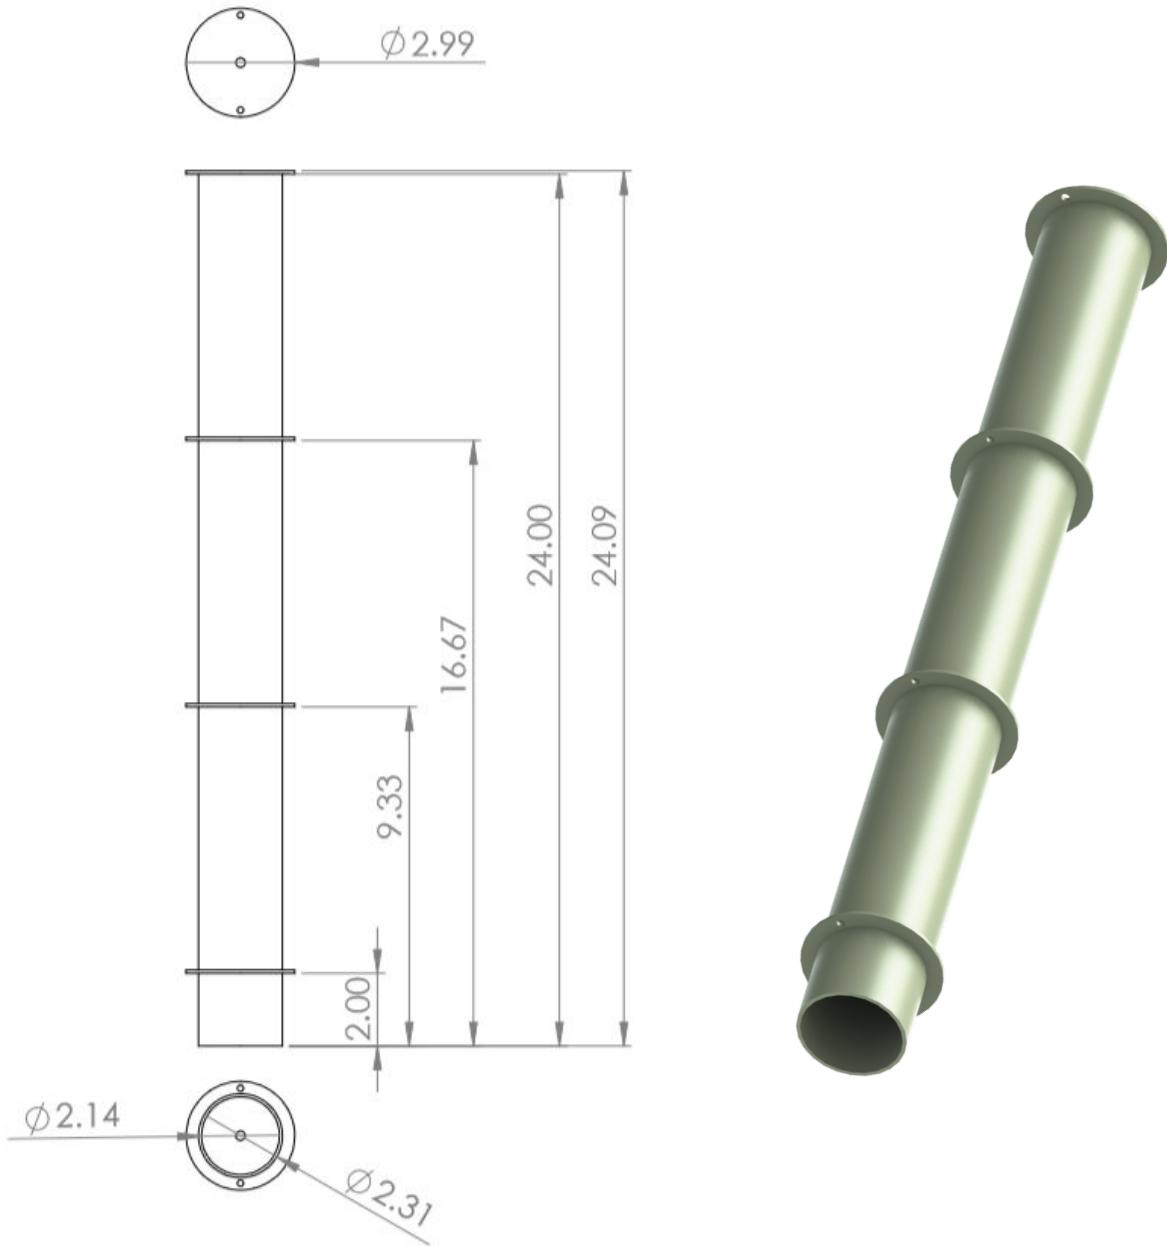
Rendering of the thrust section. Left is a dimensioned drawing (with units of Inches), right is an isometric view of the 3D model
